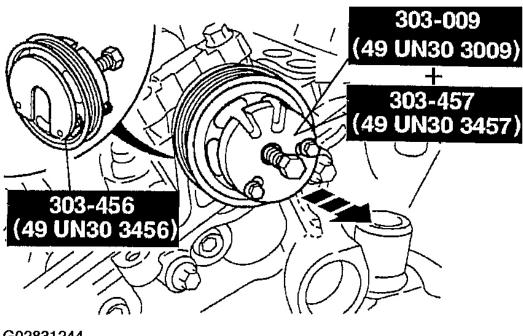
Assembling SST Courtesy of MAZDA MOTORS CORP.
